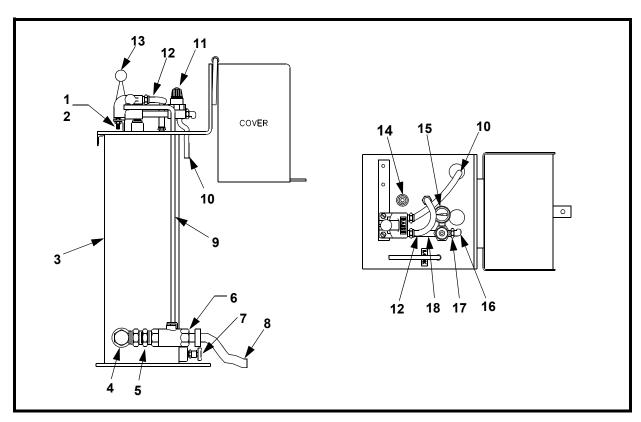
Boot-Lift® Control Console Assembly, P/N 38340X-SBL
